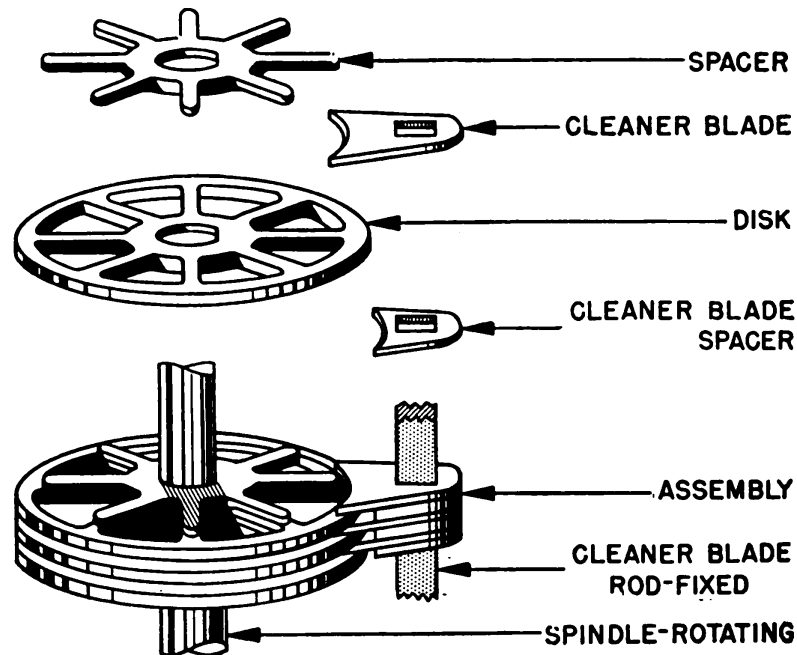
Edge-disk type strainer element assembly (GM 268A).
